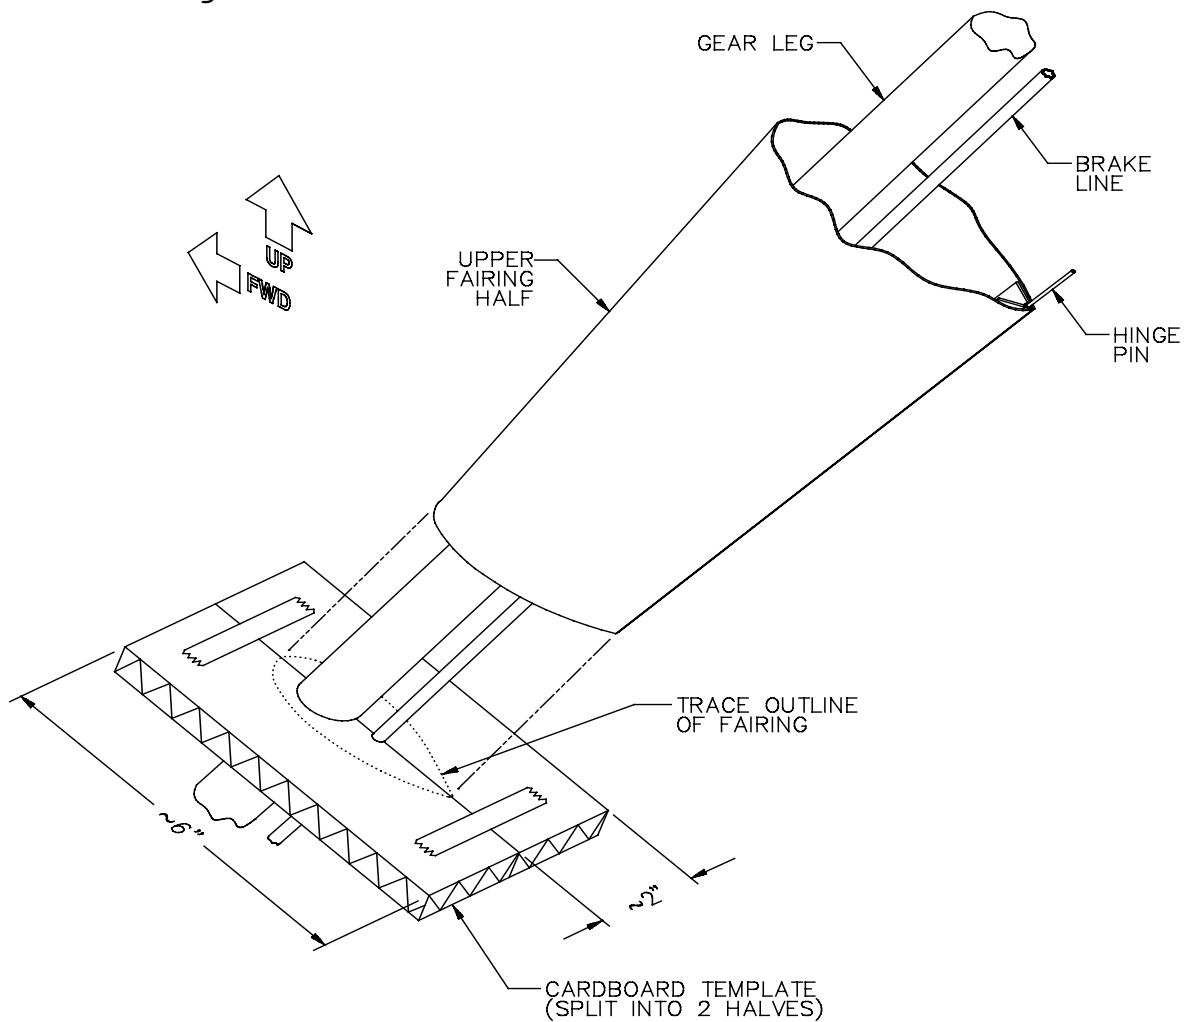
Making Cardboard Templates for the Foam Stiffener Blocks
